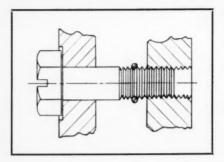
In this design, a hexagon head cap screw is used for the latch.
